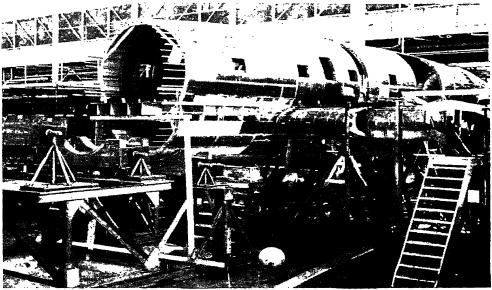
Assembling a Curtiss C-46 cargo ship. The formers, stringers, and many other parts of semimonocoque construction can be clearly seen.
